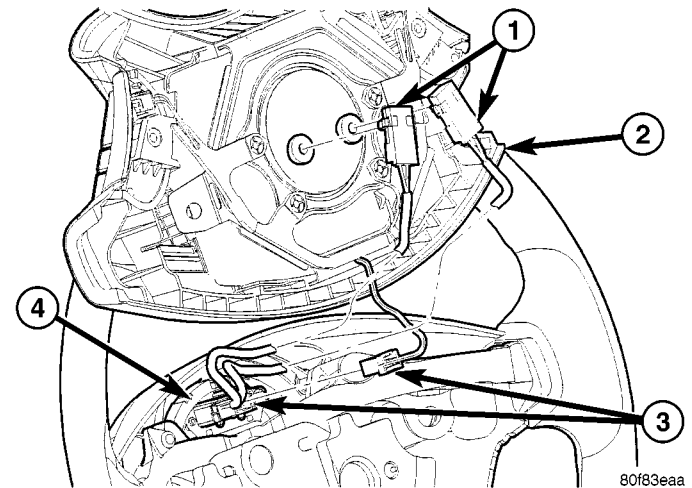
DRIVER AIRBAG WIRE CONNECTIONS
